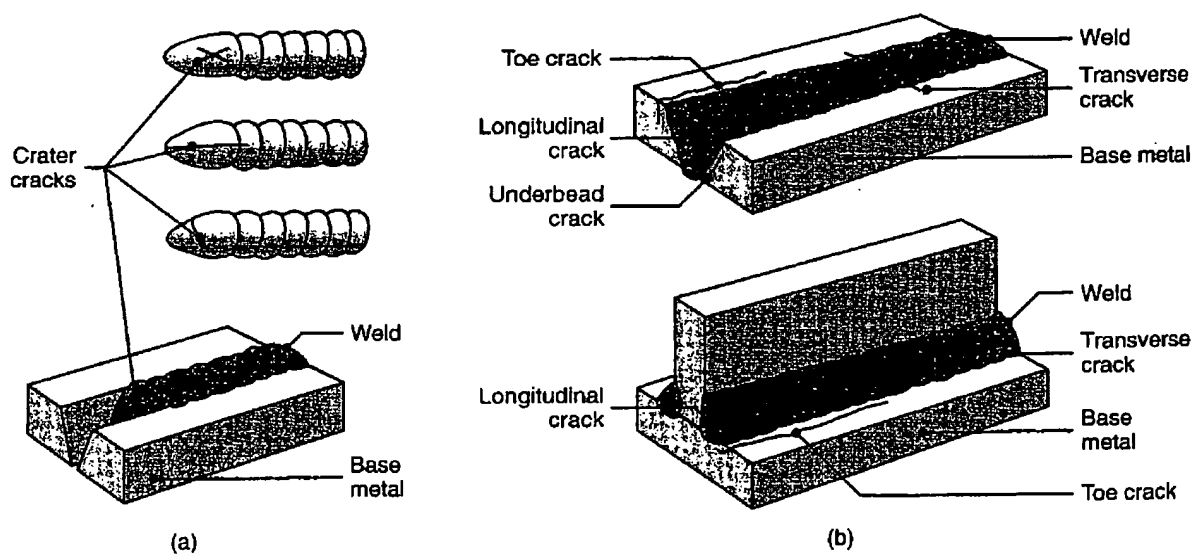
Examples of various defects in fusion welds.
